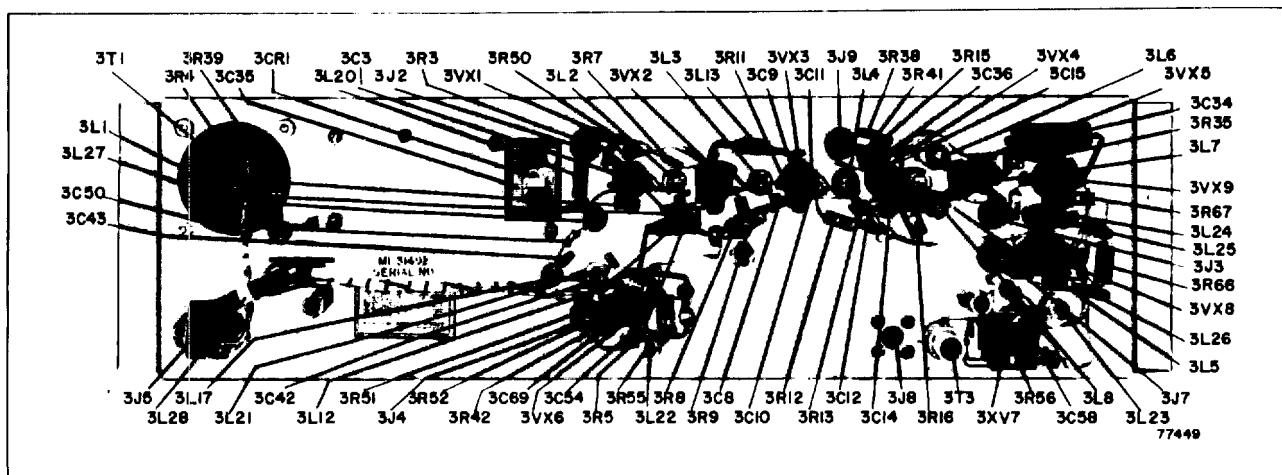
Terminal AFC Unit, MI-31492-C—Rear View, Dust Cover Removed
